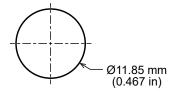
ANT-W63-SPS1 Mounting Hole Dimensions
